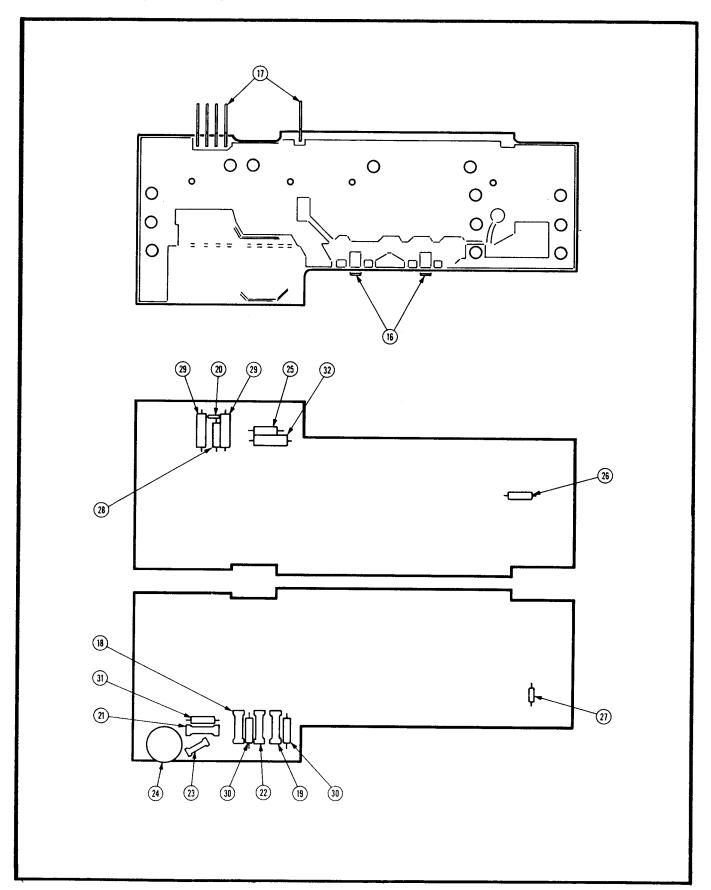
Circuit Board Assembly, Cam Switch, Channel 2 (Sheet 2 of 2).
